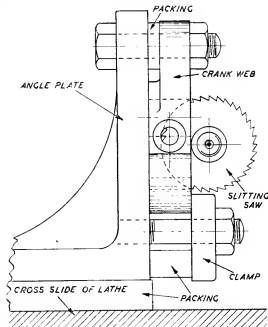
Jackshaft crank set up on an angle plate on cross slide of lathe for slitting with circular saw. (Viewed from tailstock end.)
